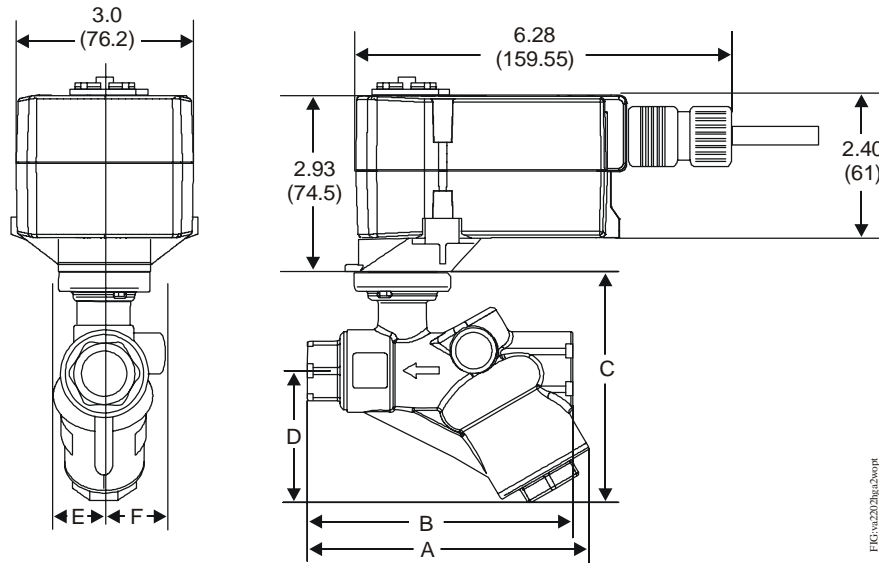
M2215 Actuated P1000 Pressure Independent Valve without Pressure Taps Dimensions, in. (mm)
